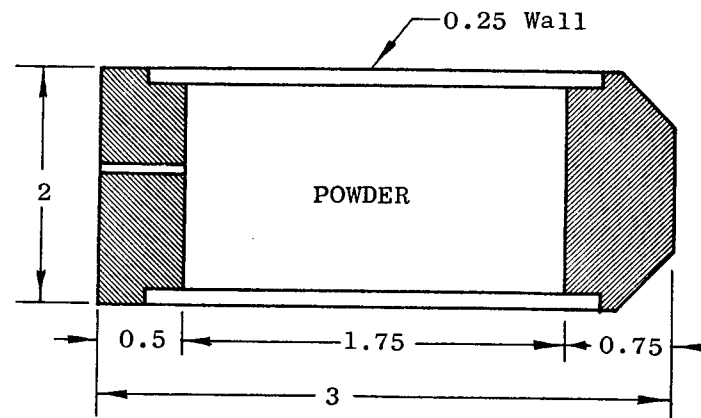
Schematic Drawing of Extrusion Cans Used for the First Extrusion Series.
